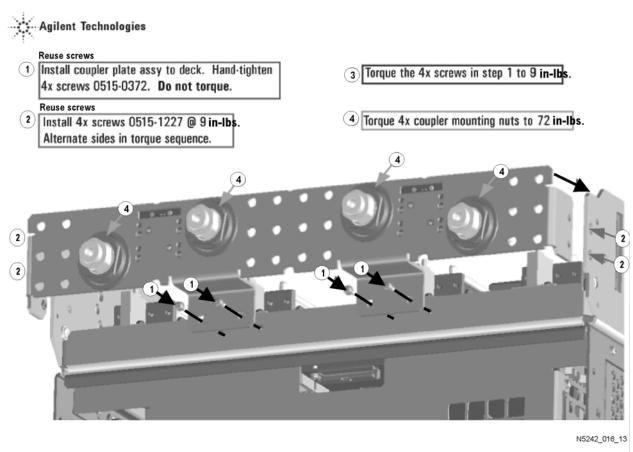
LED Board Assemblies and Test Port Coupler Assemblies Installation
